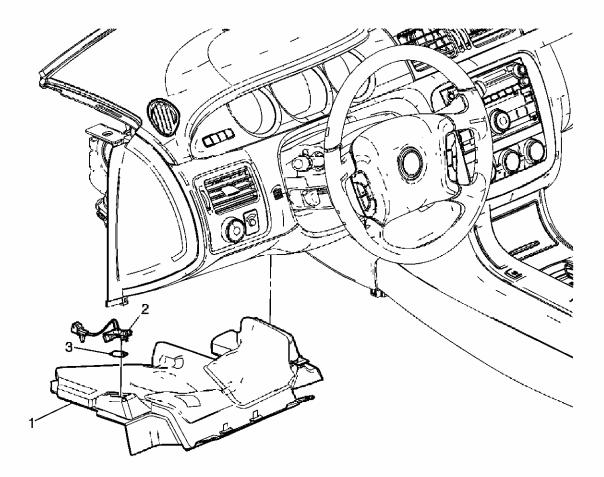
Locating Instrument Panel Courtesy Lamp Bulb Courtesy of GENERAL MOTORS CORP.
